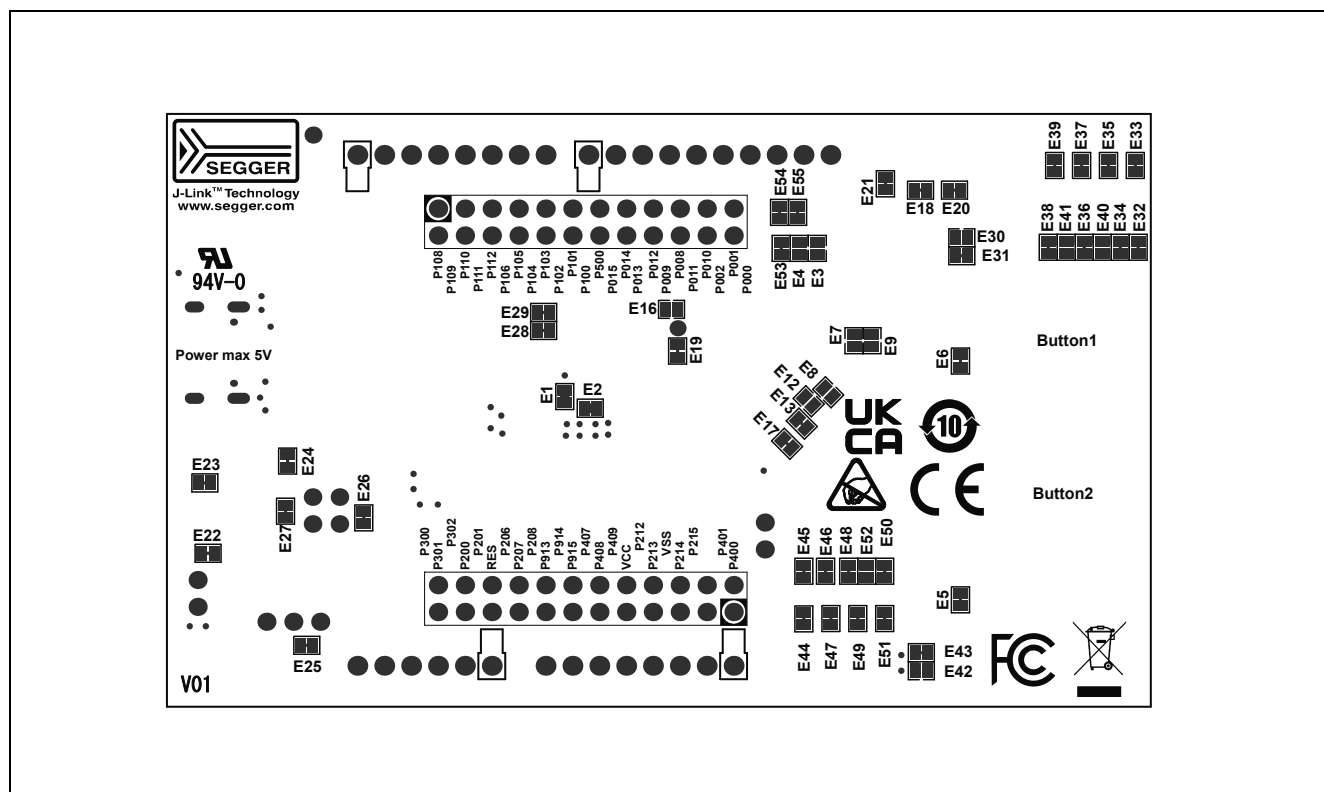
Layout Diagram of Components on the FPB-RA0L1 Board (Bottom View)
